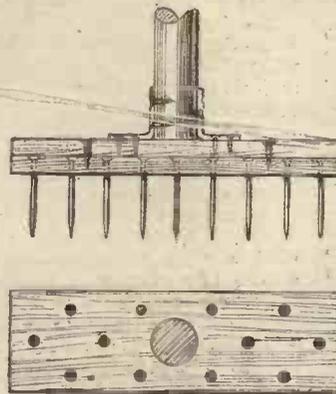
Side view and plan of a handy tool for aerating a lawn.
